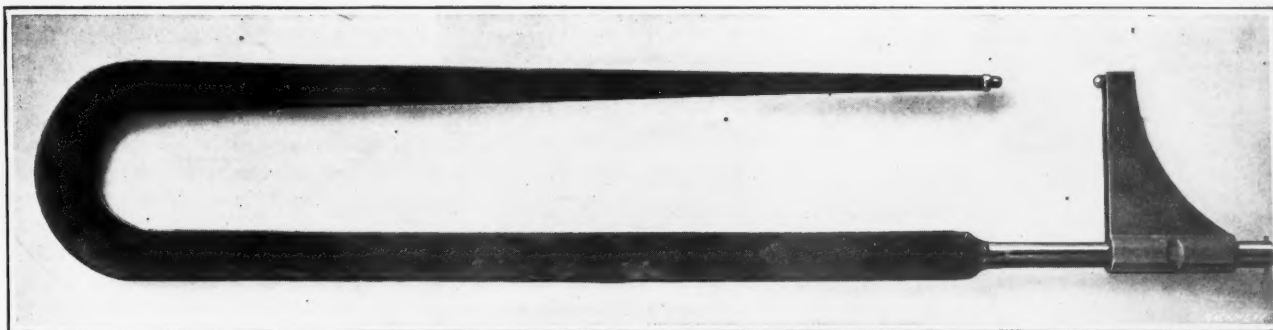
Sliding-bar Gage used in testing the Thickness of the Bottom of a Shell, and provided with an Arm which can be swung out of the Way to permit the Gage to enter the Work
